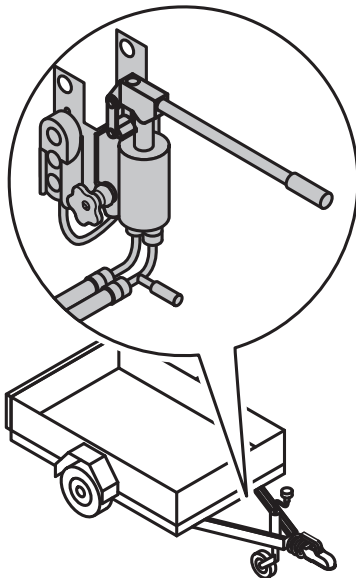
Electrohydraulic pump incl. emergency hand pump with hauler connection [accessory]
